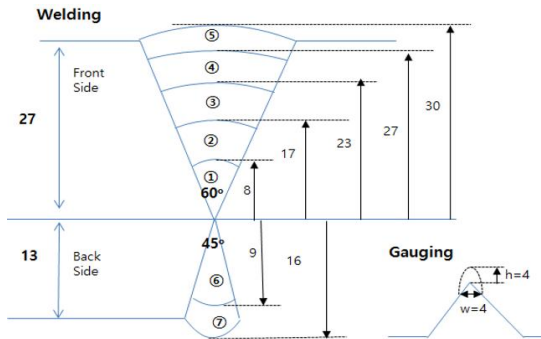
Groove shape for multi-pass butt-joint welding of 40 mm- thickness plate
